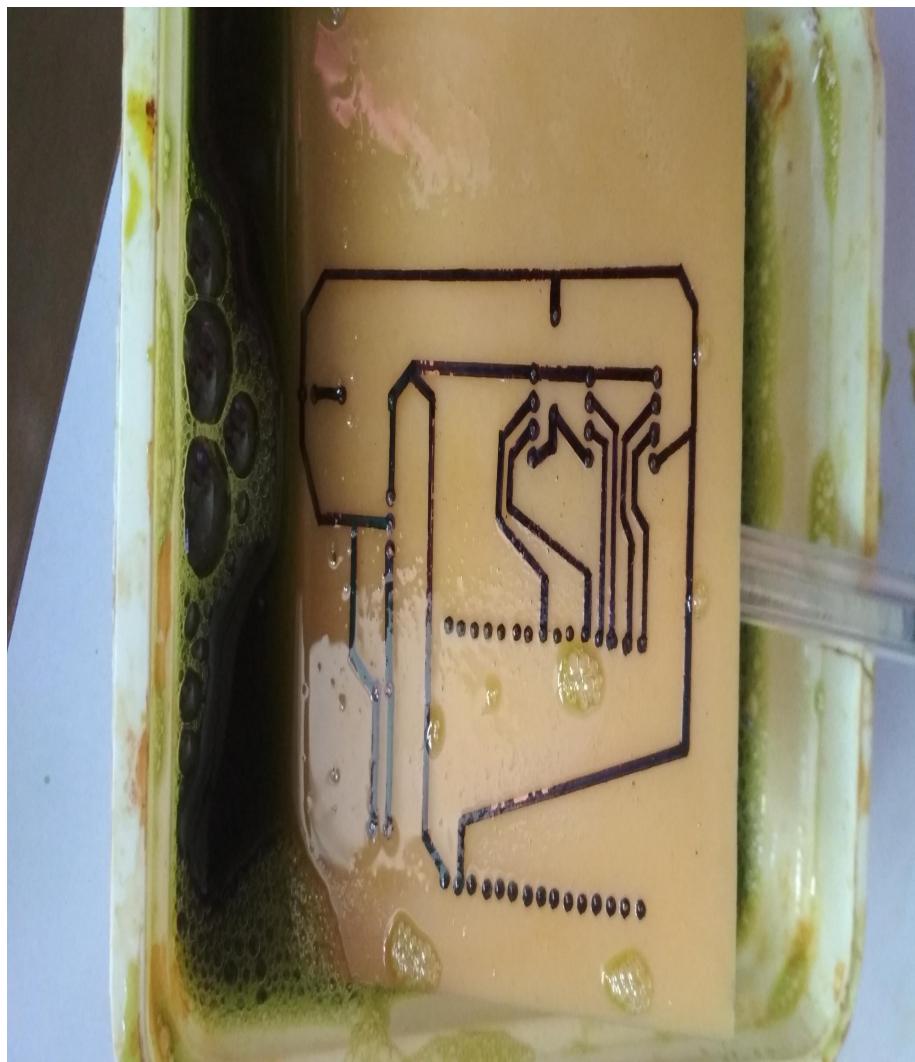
Removing Board From the solution as all the copper is Removed from the PCB except the printed part.
